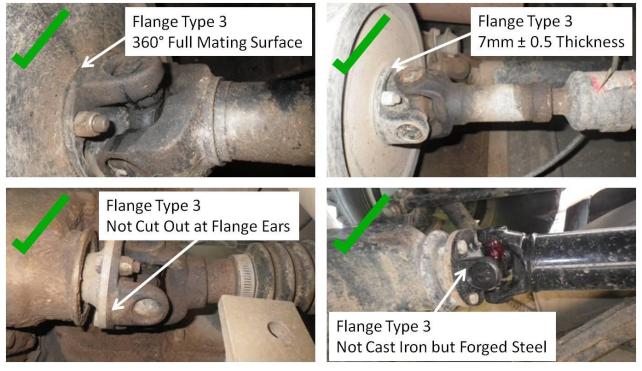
Correct Flanges Fitted (For flange identification details, refer to Figure 5)
